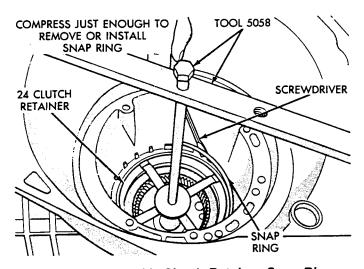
Remove 2/4 Clutch Retainer Snap Ring
